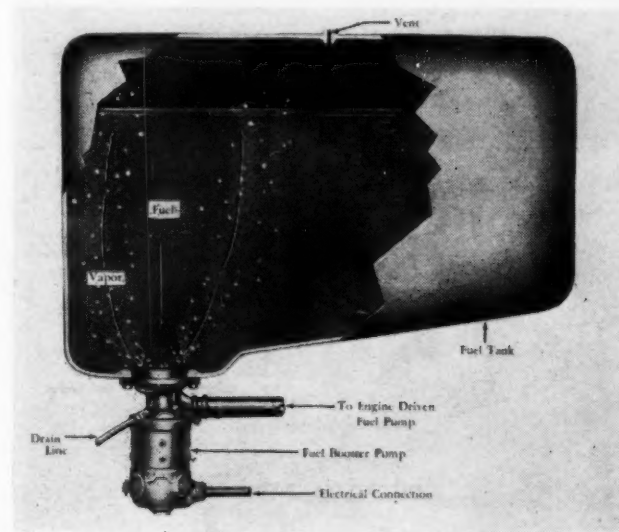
INSTALLATION OF FUEL BOOSTER PUMP
